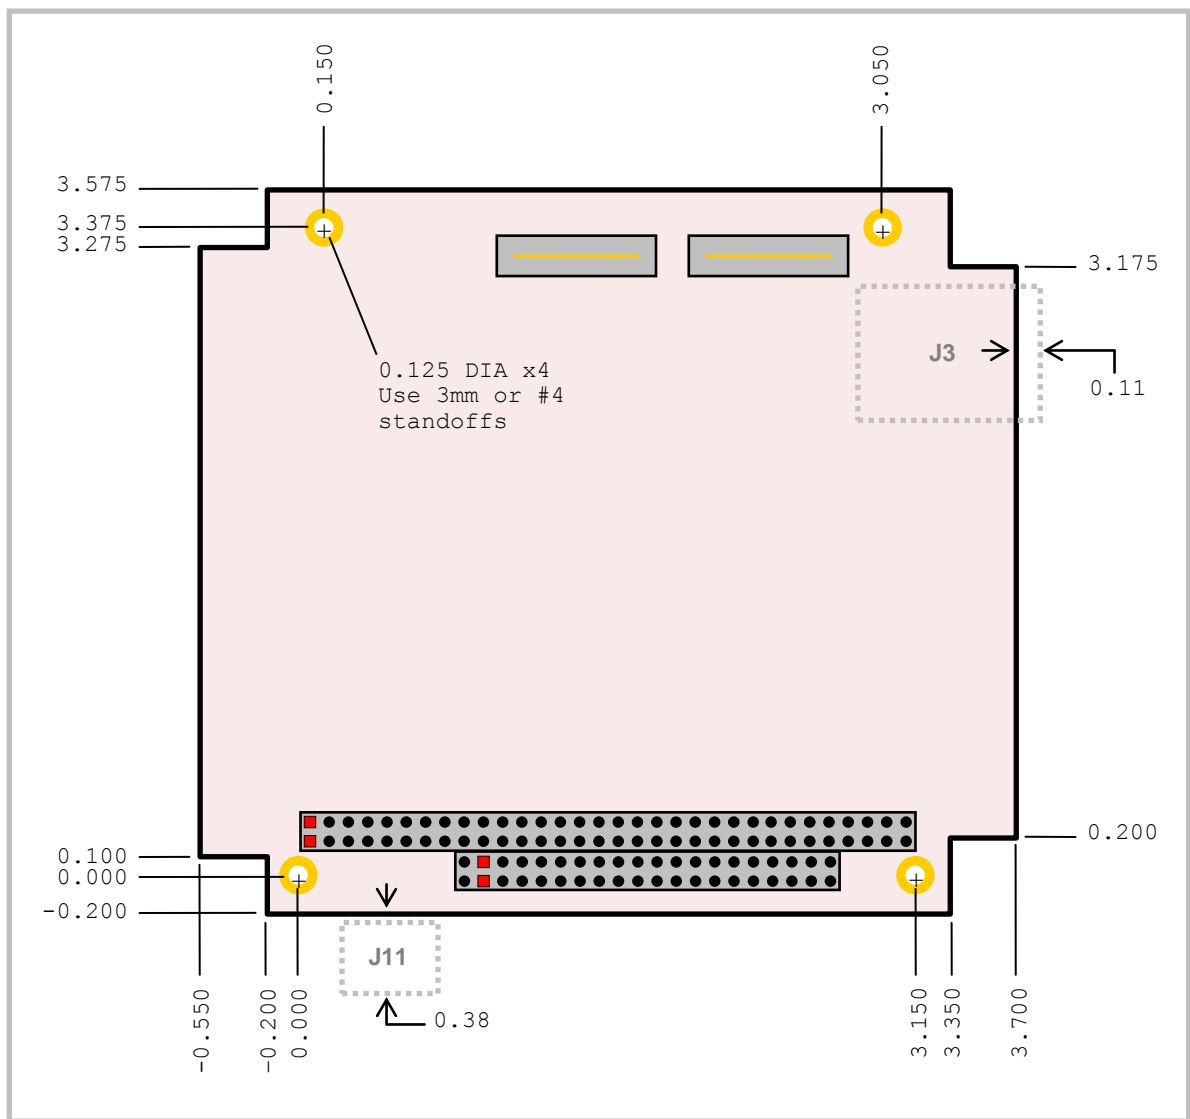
VL-EPMS-21 Dimensions and Mounting Holes
